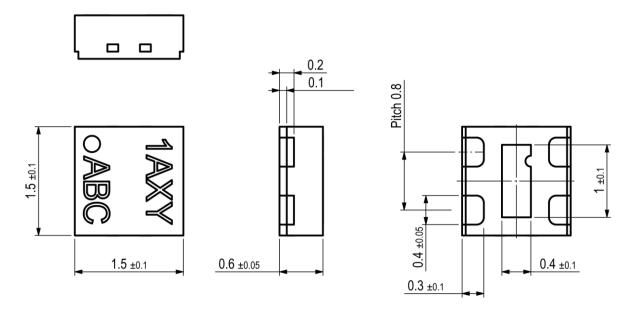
Dimensional drawing of STS4xA with wettable flanks, including package tolerances (units mm).
